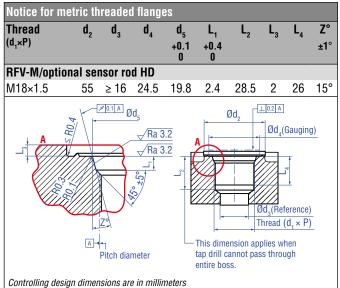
Notice for metric threaded flange M18×1.5-6g based on DIN ISO 6149-1
